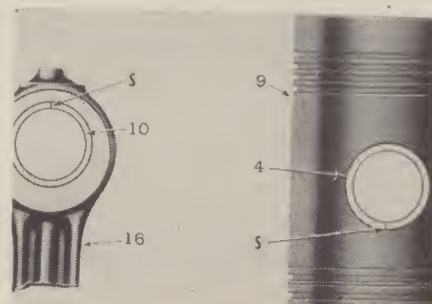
A—GM engine. Showing location of bushing split (S) in piston pin bushings (4 and 10) for piston and connecting rod.
